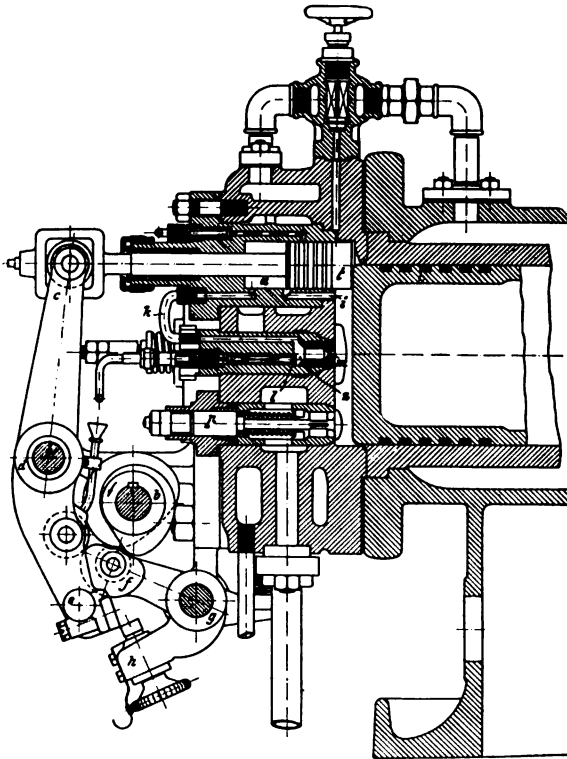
SECTION THROUGH HEAD, TRINKLER-KÖRTING ENGINE
